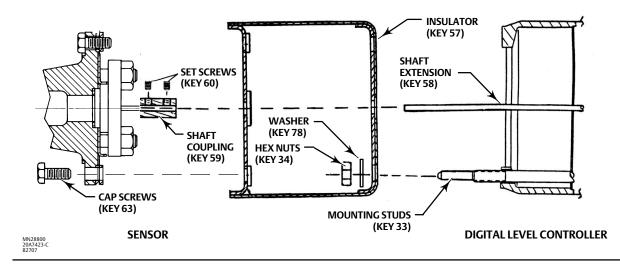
Guidelines for Use of Optional Heat Insulator Assembly
